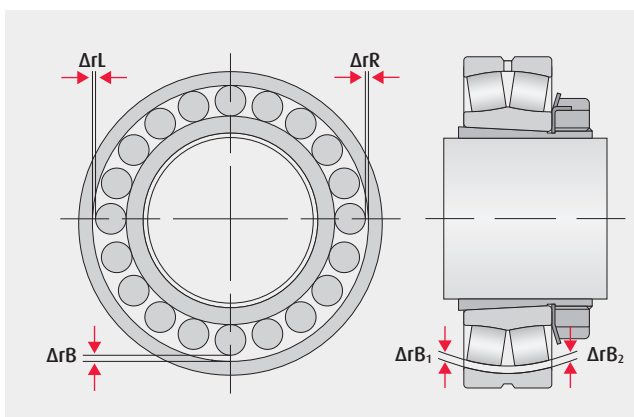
Measuring Mounted Clearance (O.D > 200 mm)
